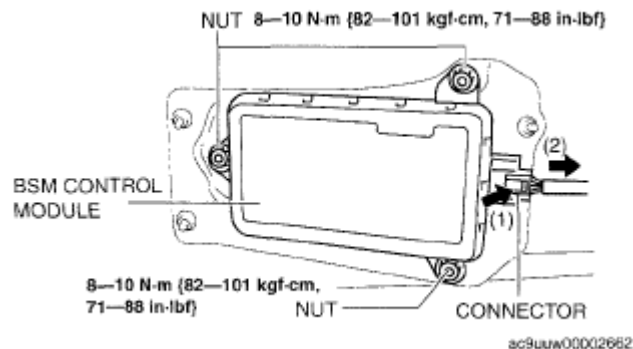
View Of Blind Spot Monitoring Control Module & Torque Specifications
